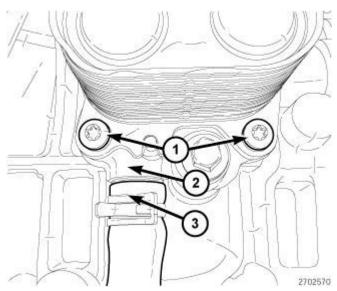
COOLANT HOSE & OIL COOLER HOUSING Courtesy of CHRYSLER LLC
